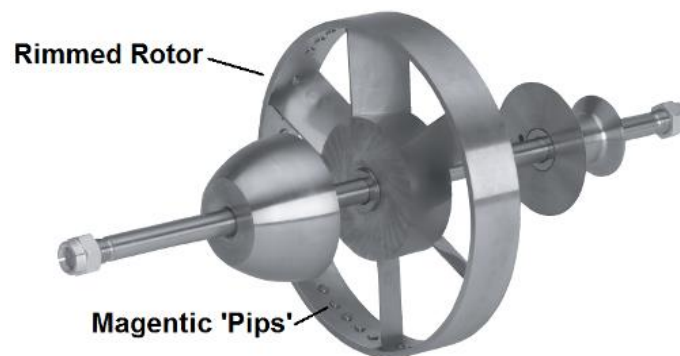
A Rimmed Turbine Meter Rotor with Magnetic 'Pips'.
